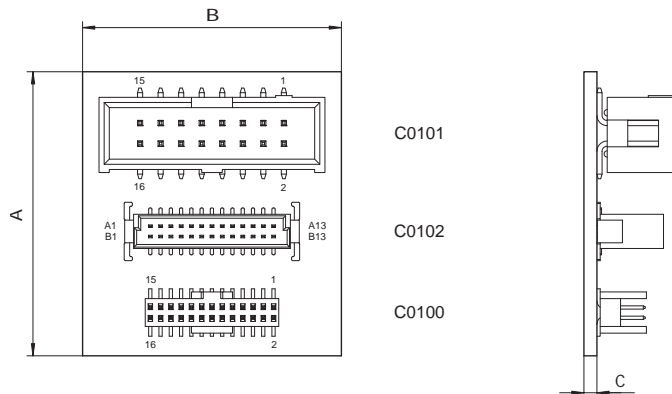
ETAF5 - Mechanical Dimensions and Component Placement
